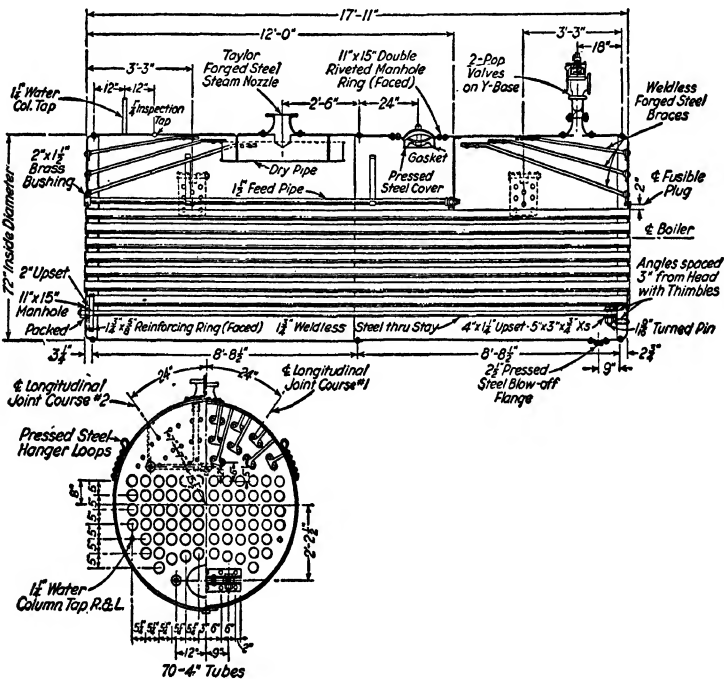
Horizontal return tubular boiler. (Courtesy Wickes Boiler Co.)
